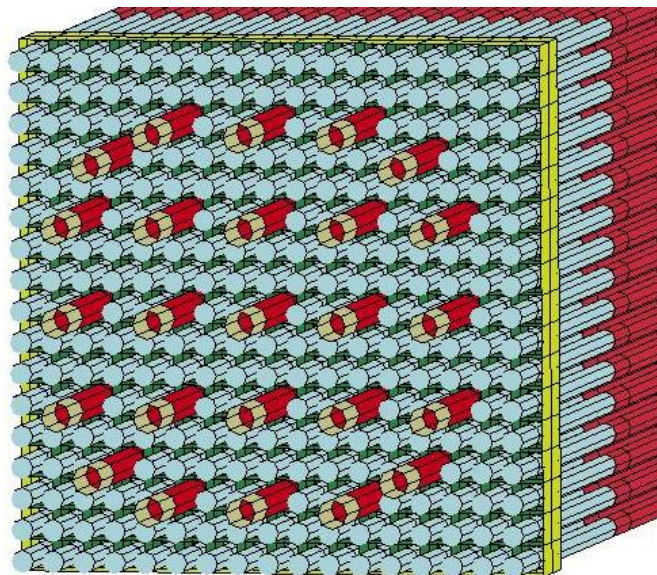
Fuel Rods and Guide Tubes at Upper End Spacer Grid
